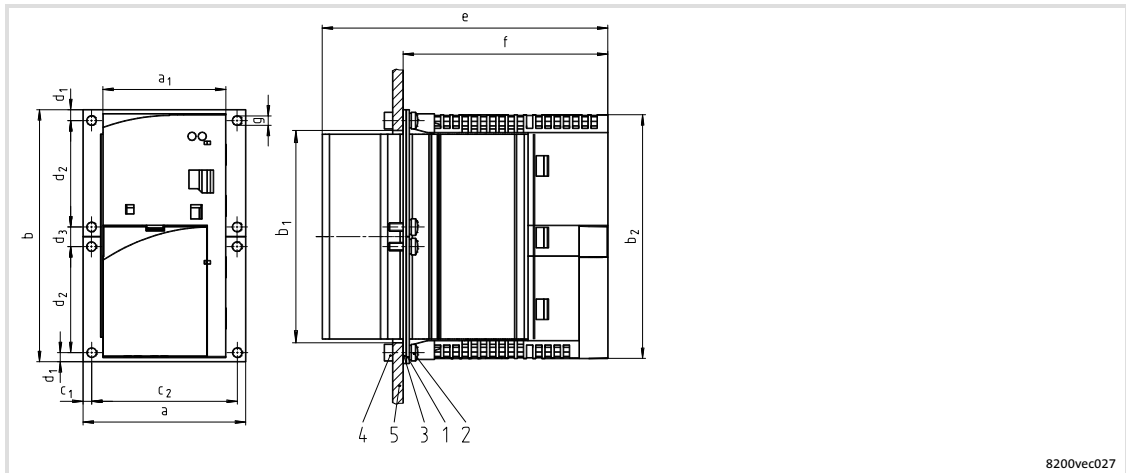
Dimensions for thermally separated mounting 0.25 ... 0.75 kW
